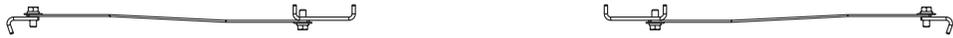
End View of Hold-Down Bracket for Retention Bar Assembly
